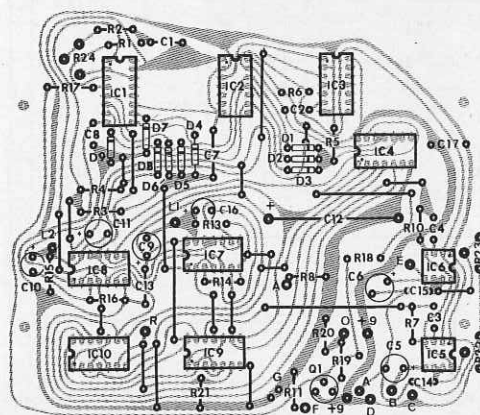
Actual-size etching and drilling guide is at right. Component layout guide is below.
